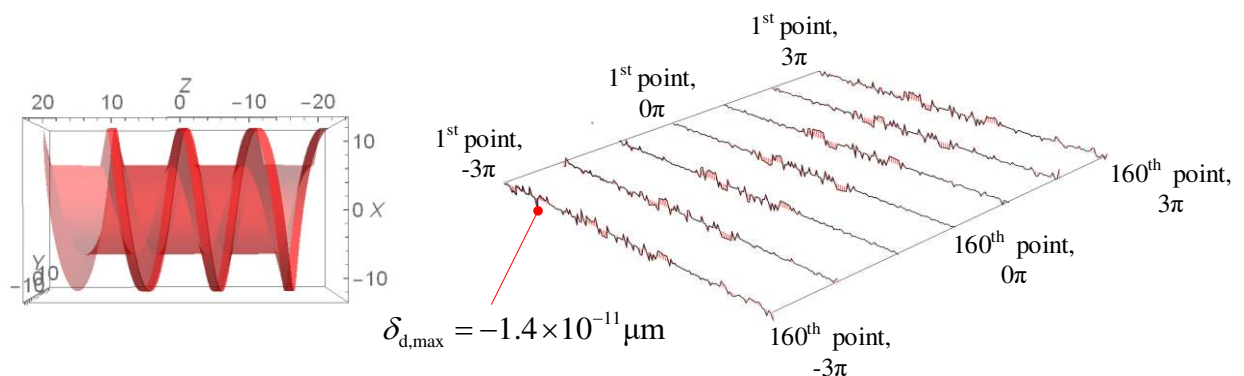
Surface topology of the cylindrical roller-gear cam with a conical roller
